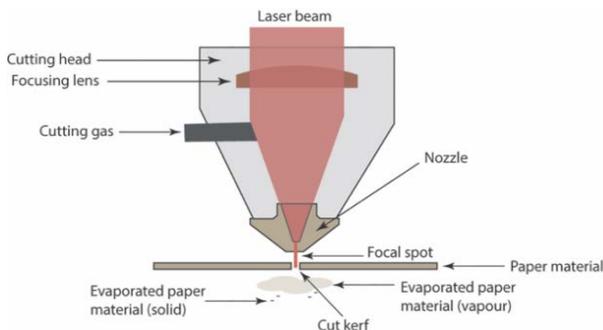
A Schematic of a Laser Beam Head and Cutting Mechanism.
